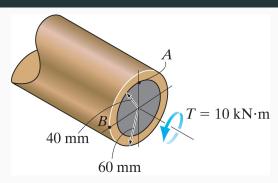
A hollow circular shaft with outer radius of 60 mm and inner radius of 40 mm. Point A is on the inner surface,
